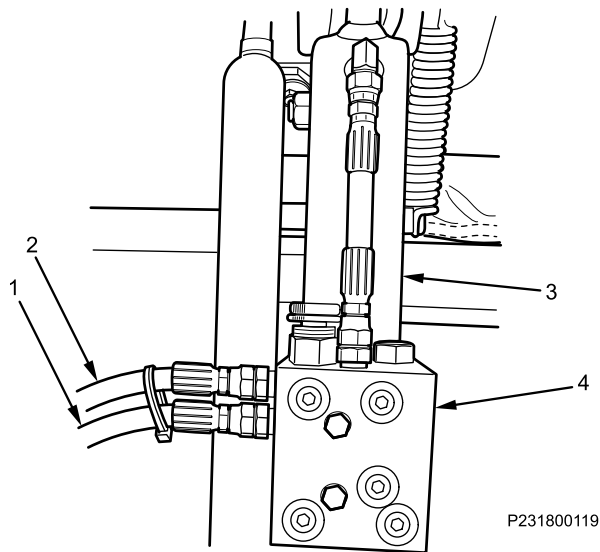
Hydraulic Hose Lines Removal and Hydraulic Fluid Drained.
